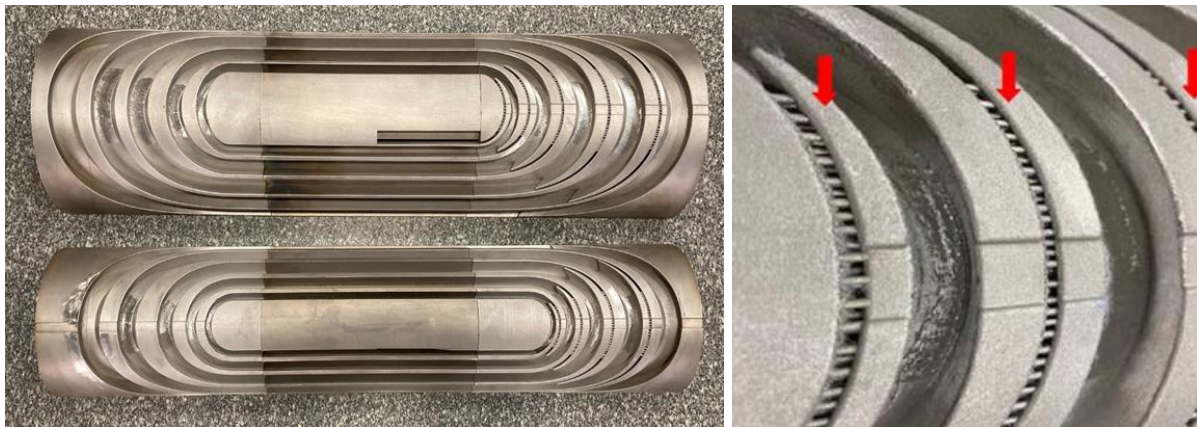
SMCT coil parts printed as two-layer cylinders with removed surface support inside blocks (left) and narrow inter block channels in LE with surface supports before removal (right).
